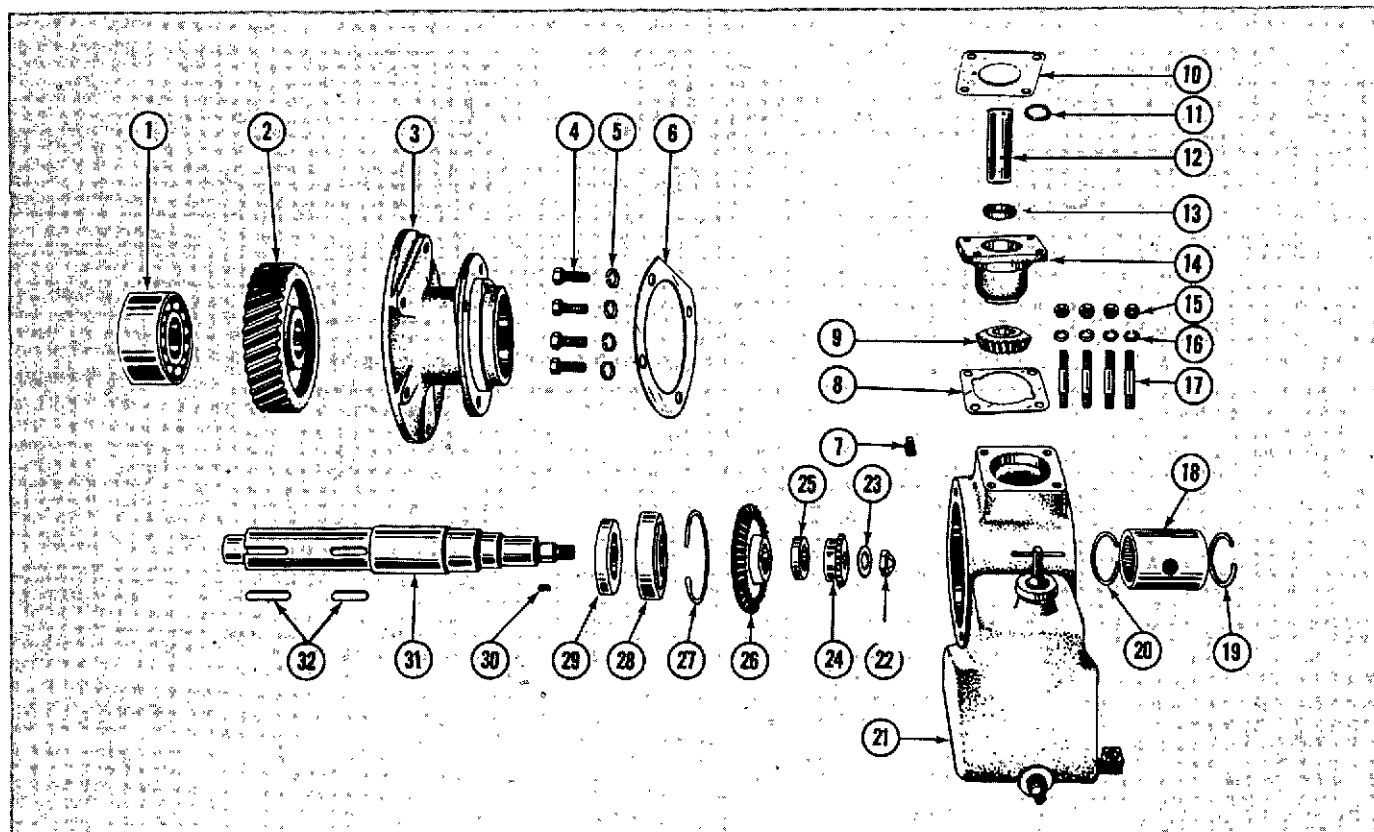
, N10907. Fuel pump/hydraulic governor drive
